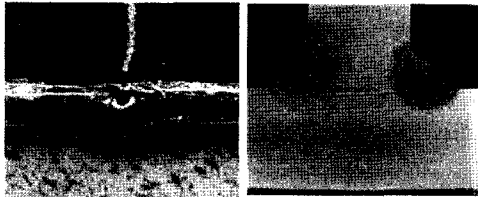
Shape of blow hole and macro-structure on fillet weldment
